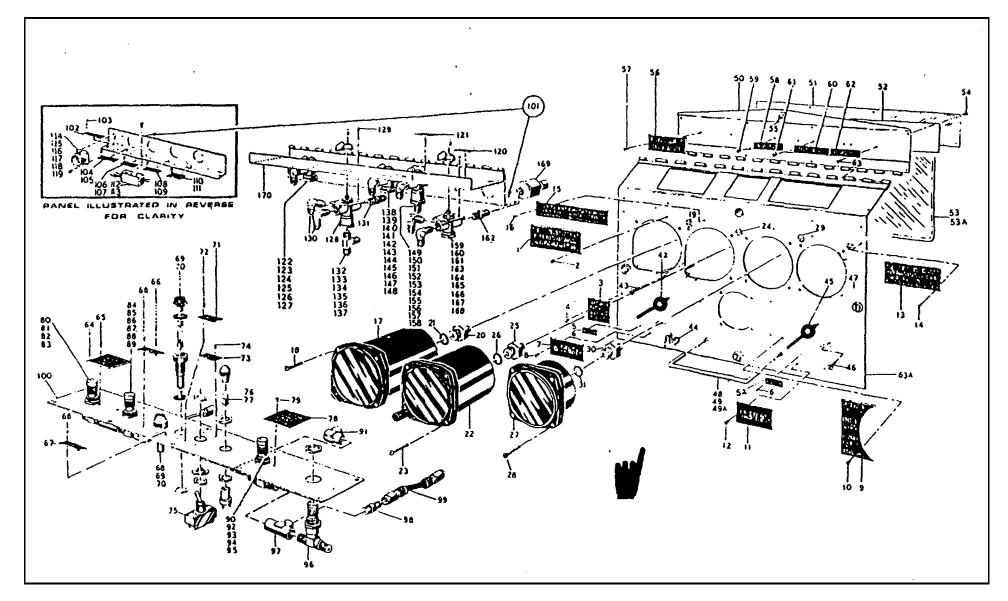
Tester Assembly (Sheet 1 of 2 Sheets)
